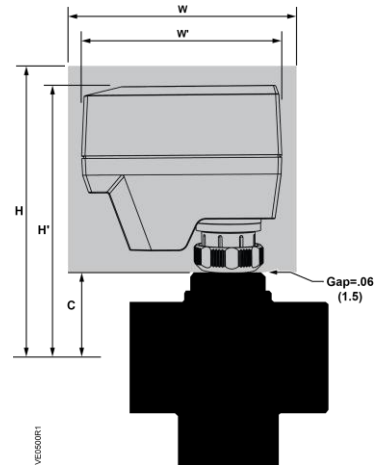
Electric Actuator SSE/F Series with 3-Way Valve: Assembly Service Envelope.
